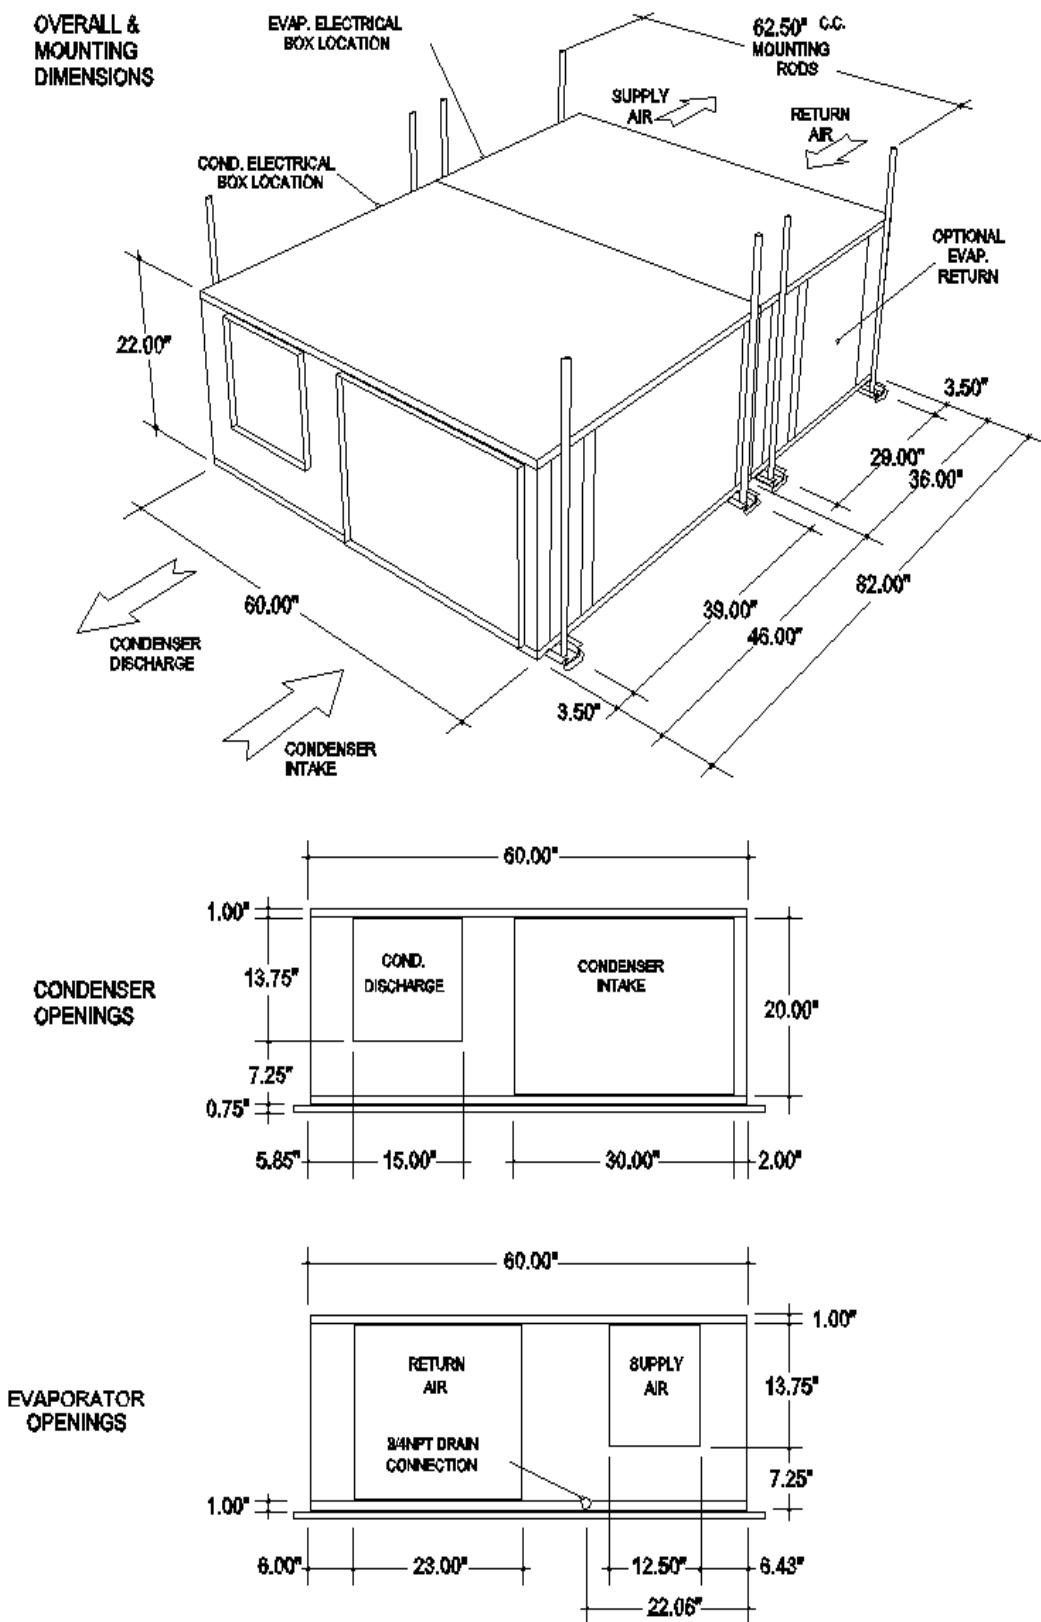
4 TO 5 TON UNIT DIMENSIONS
